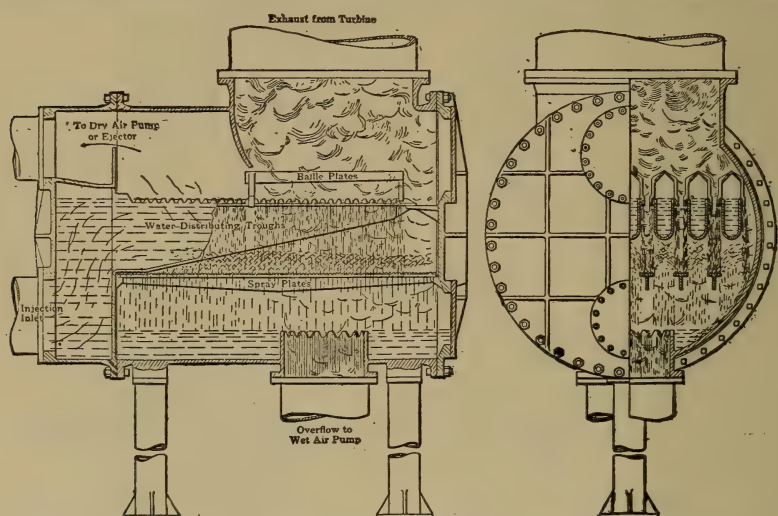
Tomlinson Type C High-vacuum Jet Condenser.
